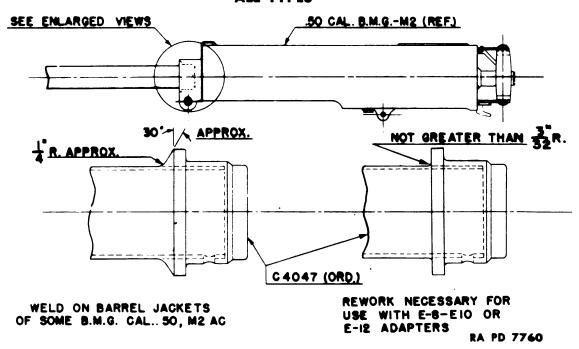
Excessive Weld Metal On Barrel Jacket
